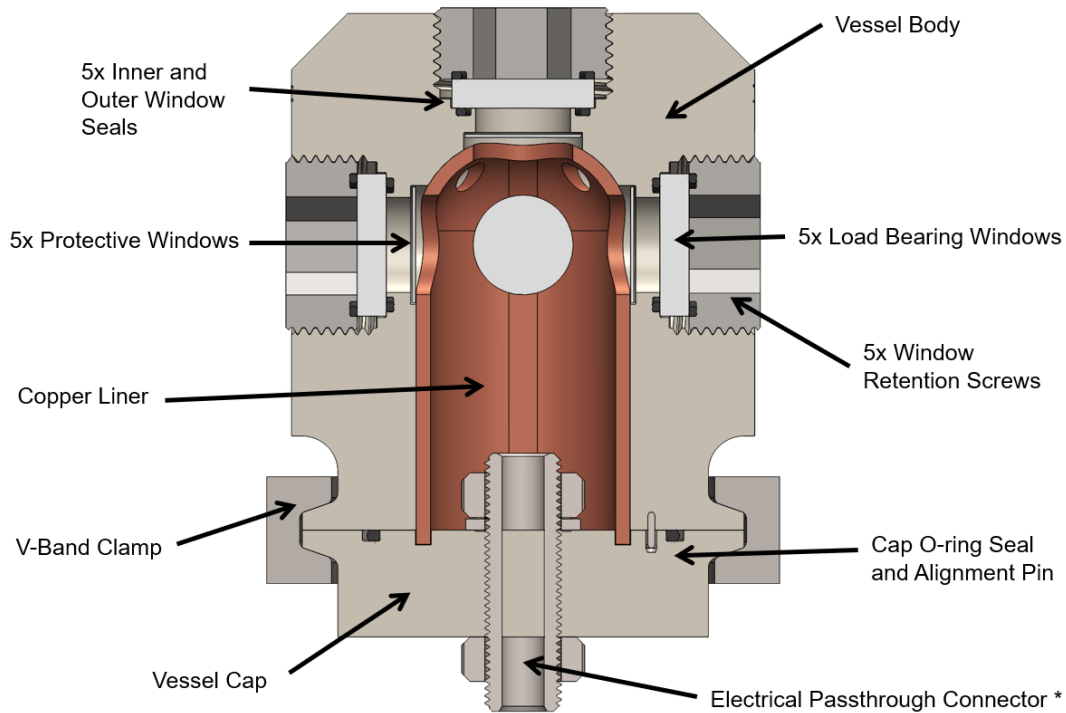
Cross sectional view of pressure vessel sub-assembly
